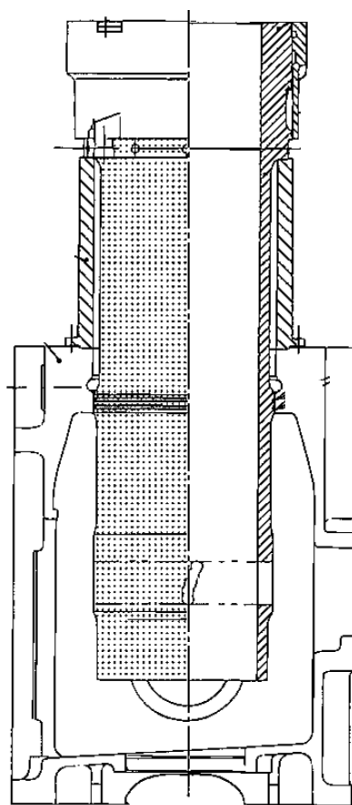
Working cylinder bushing for 6DKRN 80/230 engine
